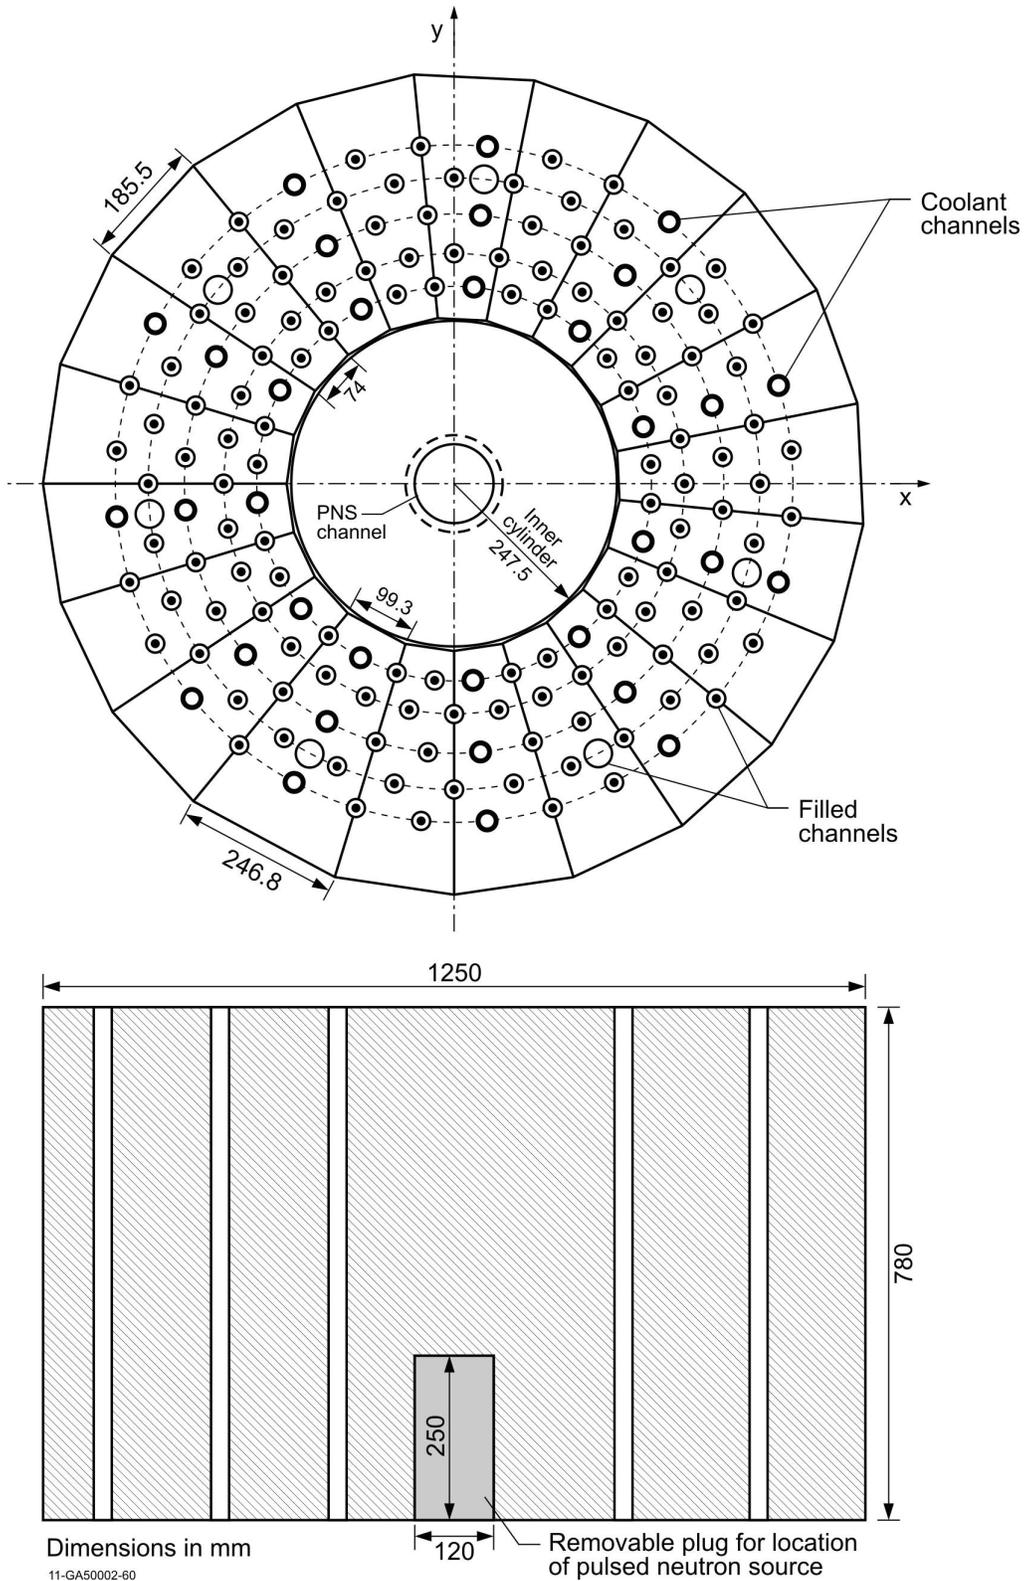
Details of the Lower Axial Reflector. Note the 33 coolant channels, the small air gap between outer and inner parts, and the position of the pulsed source channel (Ref. 2).
